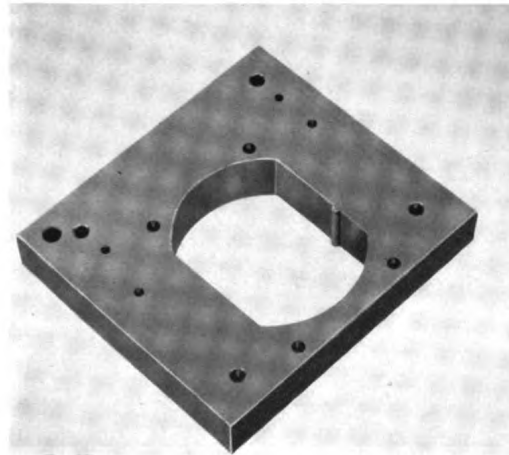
Both the radii and straight surfaces of the stator blanking station of the stator-rotor lamination die are most efficiently ground with the horizontal spindle attachment on the Jig Grinder.
